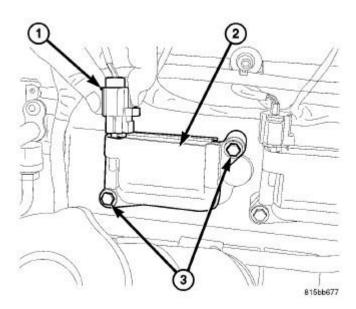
Ignition Coil Mounting Bolts Courtesy of CHRYSLER LLC
